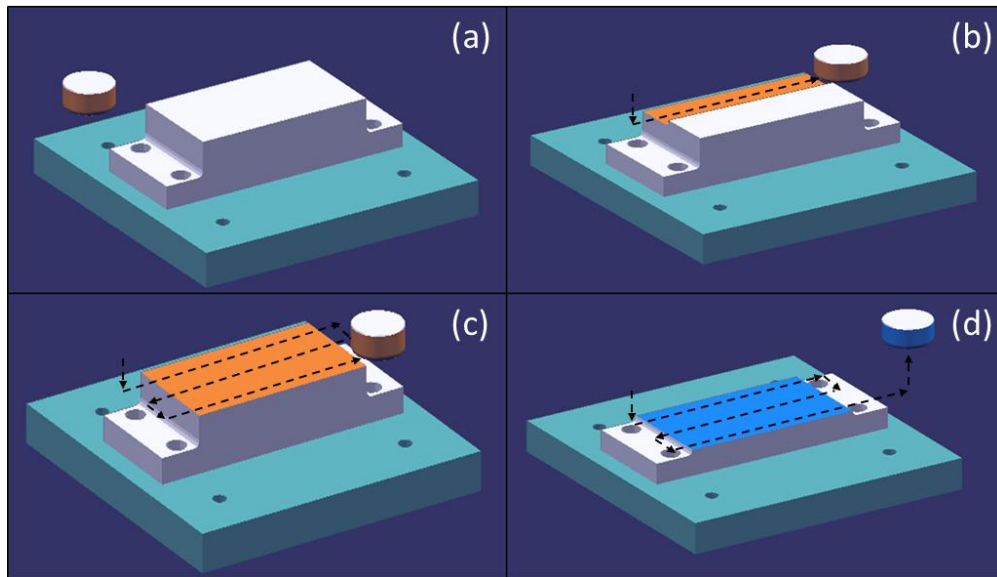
Sequential machining coupon (a) initial configuration (b) first roughing pass (c) n roughing pass (d) after finish machining
